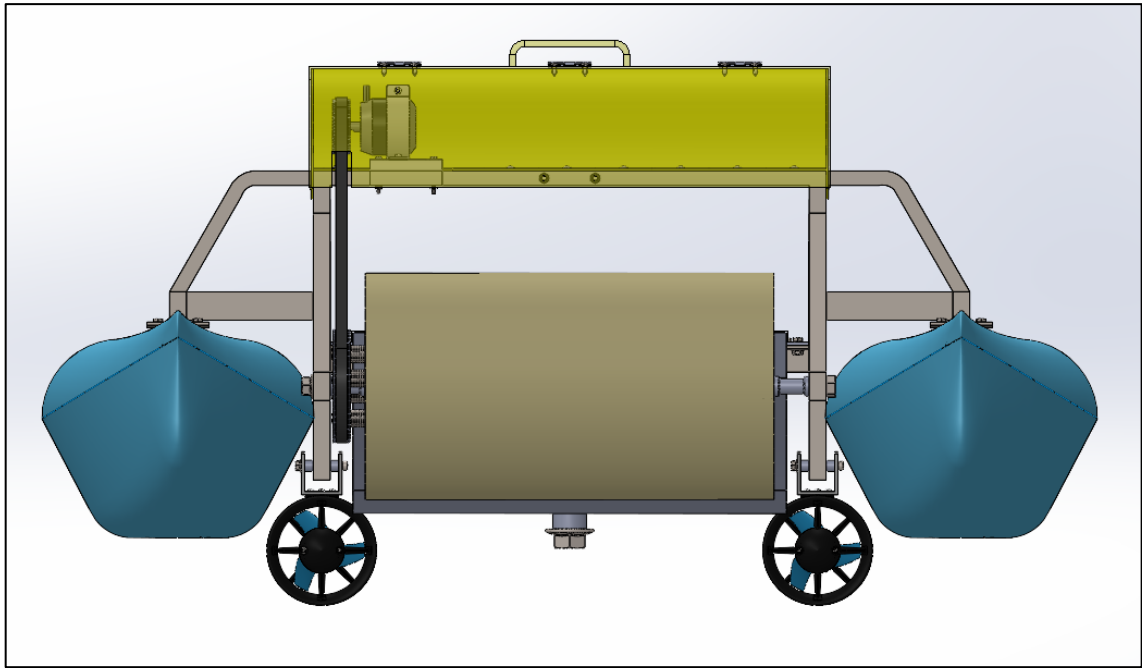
Front view of enhanced Portable Oil Spill Skimmer assembly
